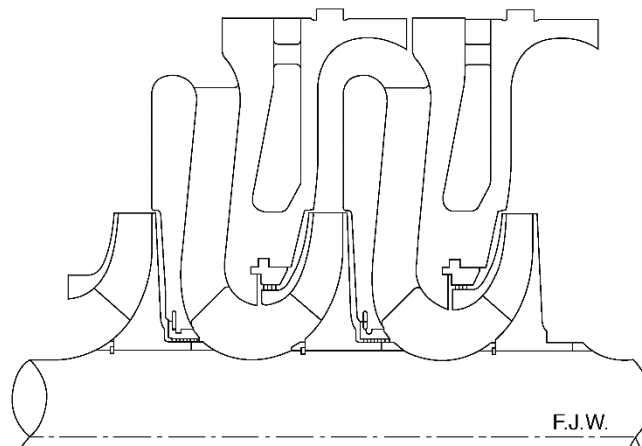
Seals are required at the impeller eye and rotor shaft to prevent gas backflow from the discharge to the inlet end of a compressor stage.
